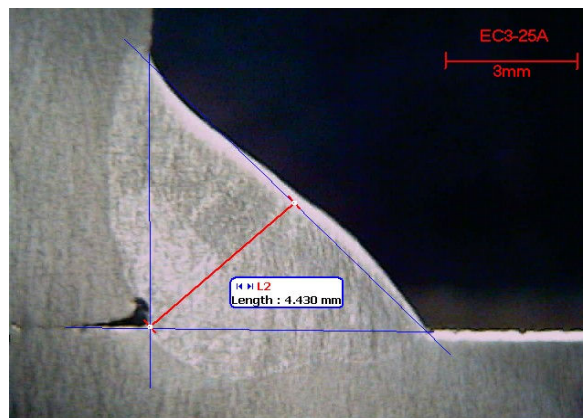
Macroscopic Image of Weld Cross Section
